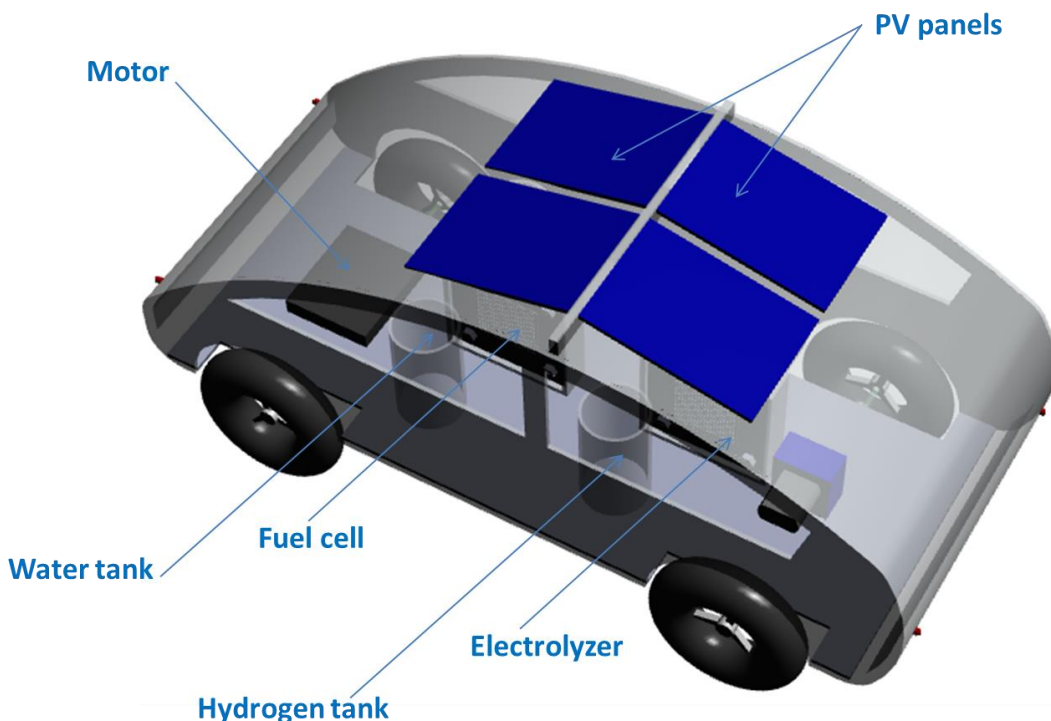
The design of new Water Fueled hybrid car prototype
